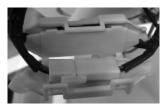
Connecting the Articulating Arm and Vertical Column Cables
